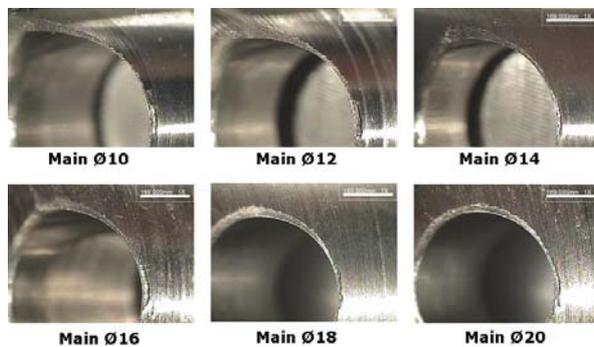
deburring result according to main hole size ( $\varnothing 9$  crossing hole, 90mm/min, 900rpm)
